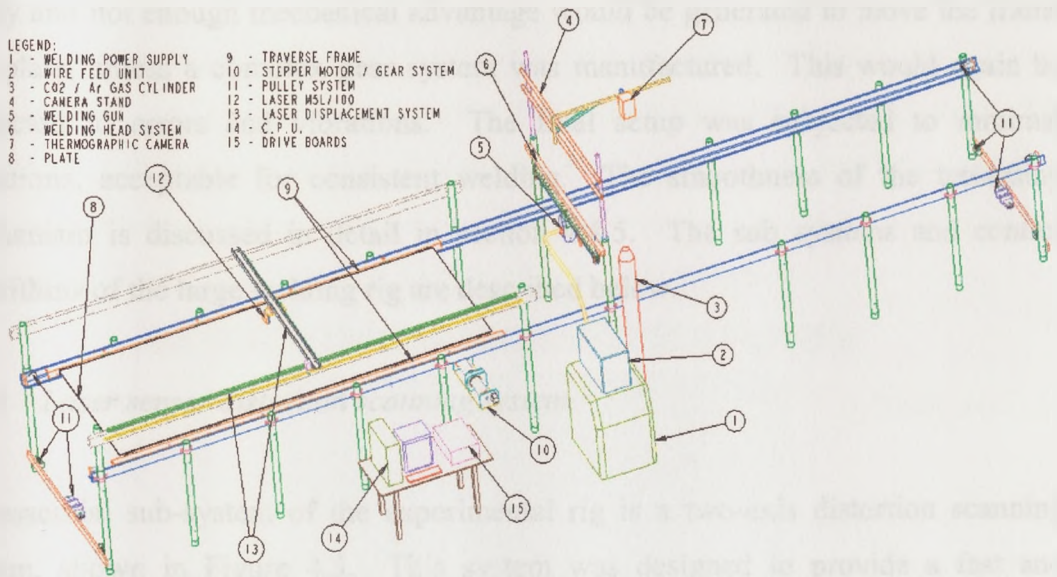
Schematic diagram of the large-scale welding rig.
